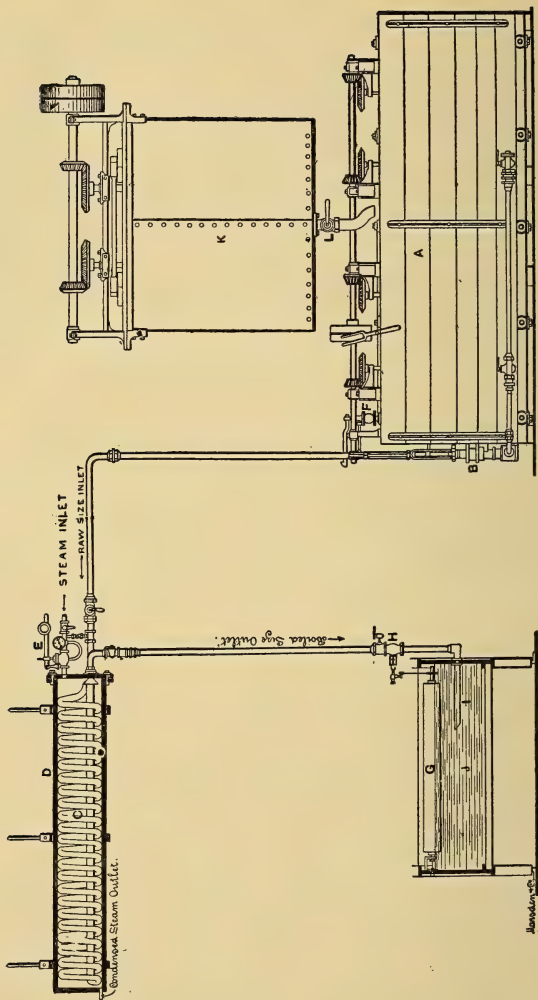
MECHANICAL SIZE MIXER AND COIL BOILER.
